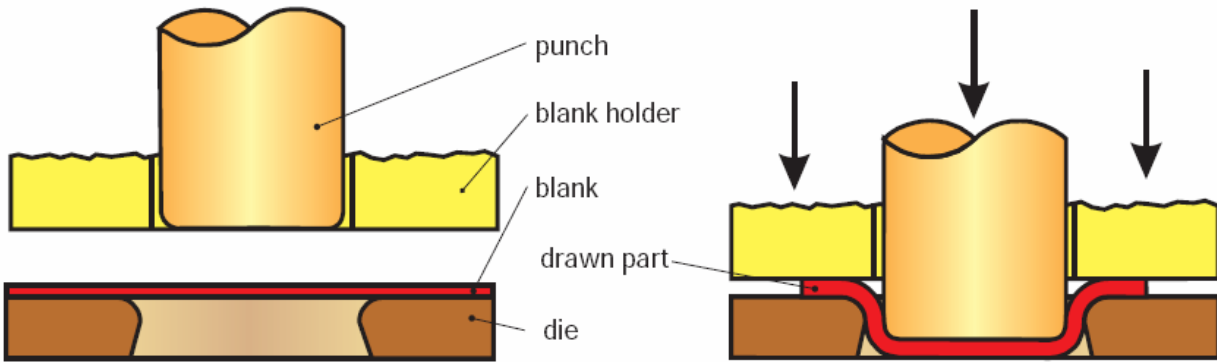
Single-draw deep drawing with blank holder (Schuler Metal Forming Handbook, 1998)
